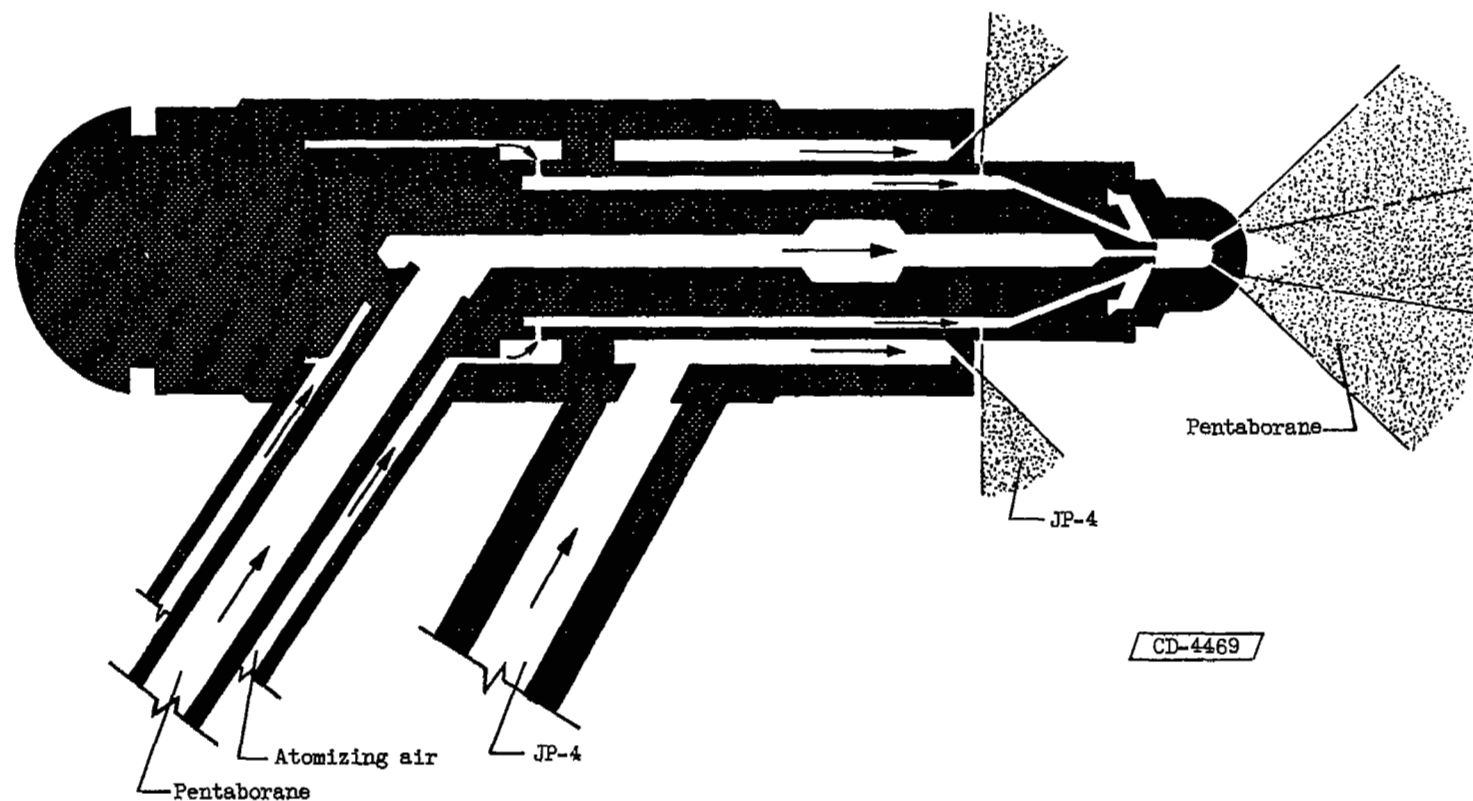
Air-atomizing fuel nozzle used during pentaborane fuel test in full-scale turbojet engine. Nozzle also provided for use of JP-4 fuel.
